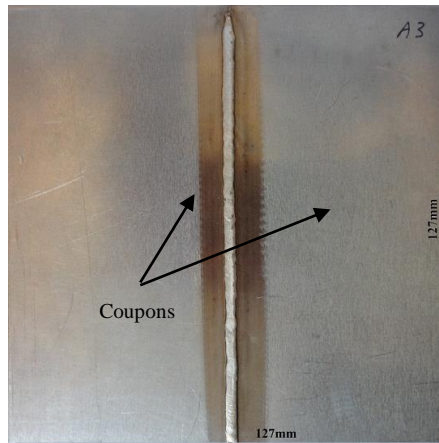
An IN718 plate made from welded coupons
